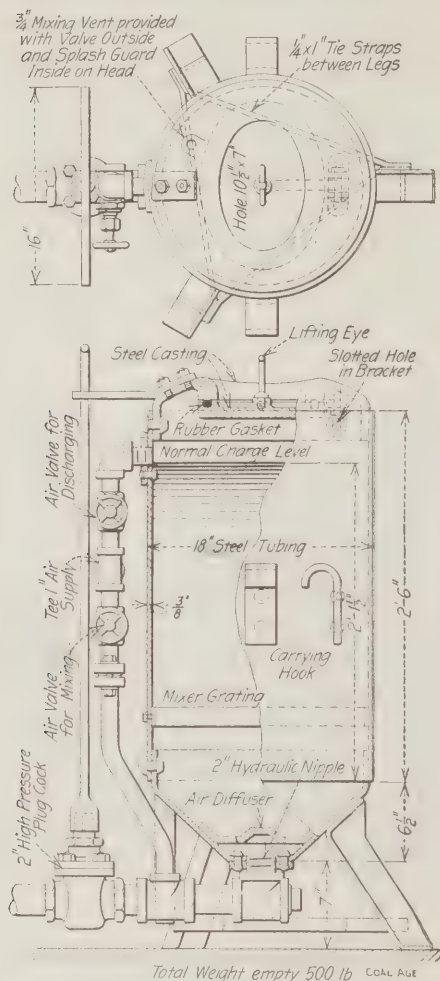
GROUT MIXING TANK AND CONNECTIONS
